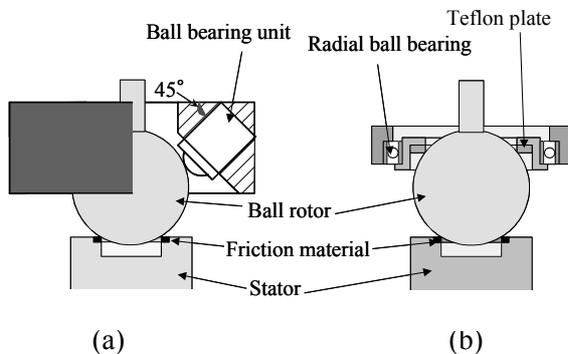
Support mechanism using: (a), three ball bearing units; (b), a Teflon plate.
